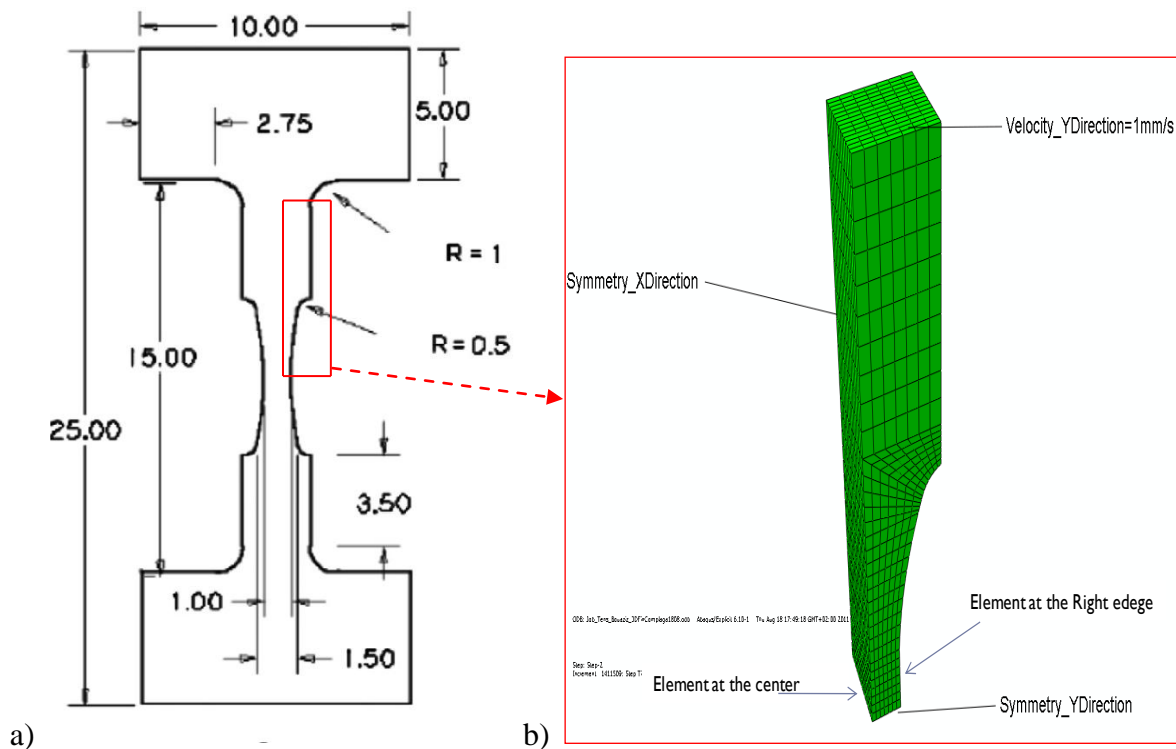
a) Geometry of the sample (dimensions in mm), b) Mesh of the flat sheet square specimen for DPI steel 1mm thick.
